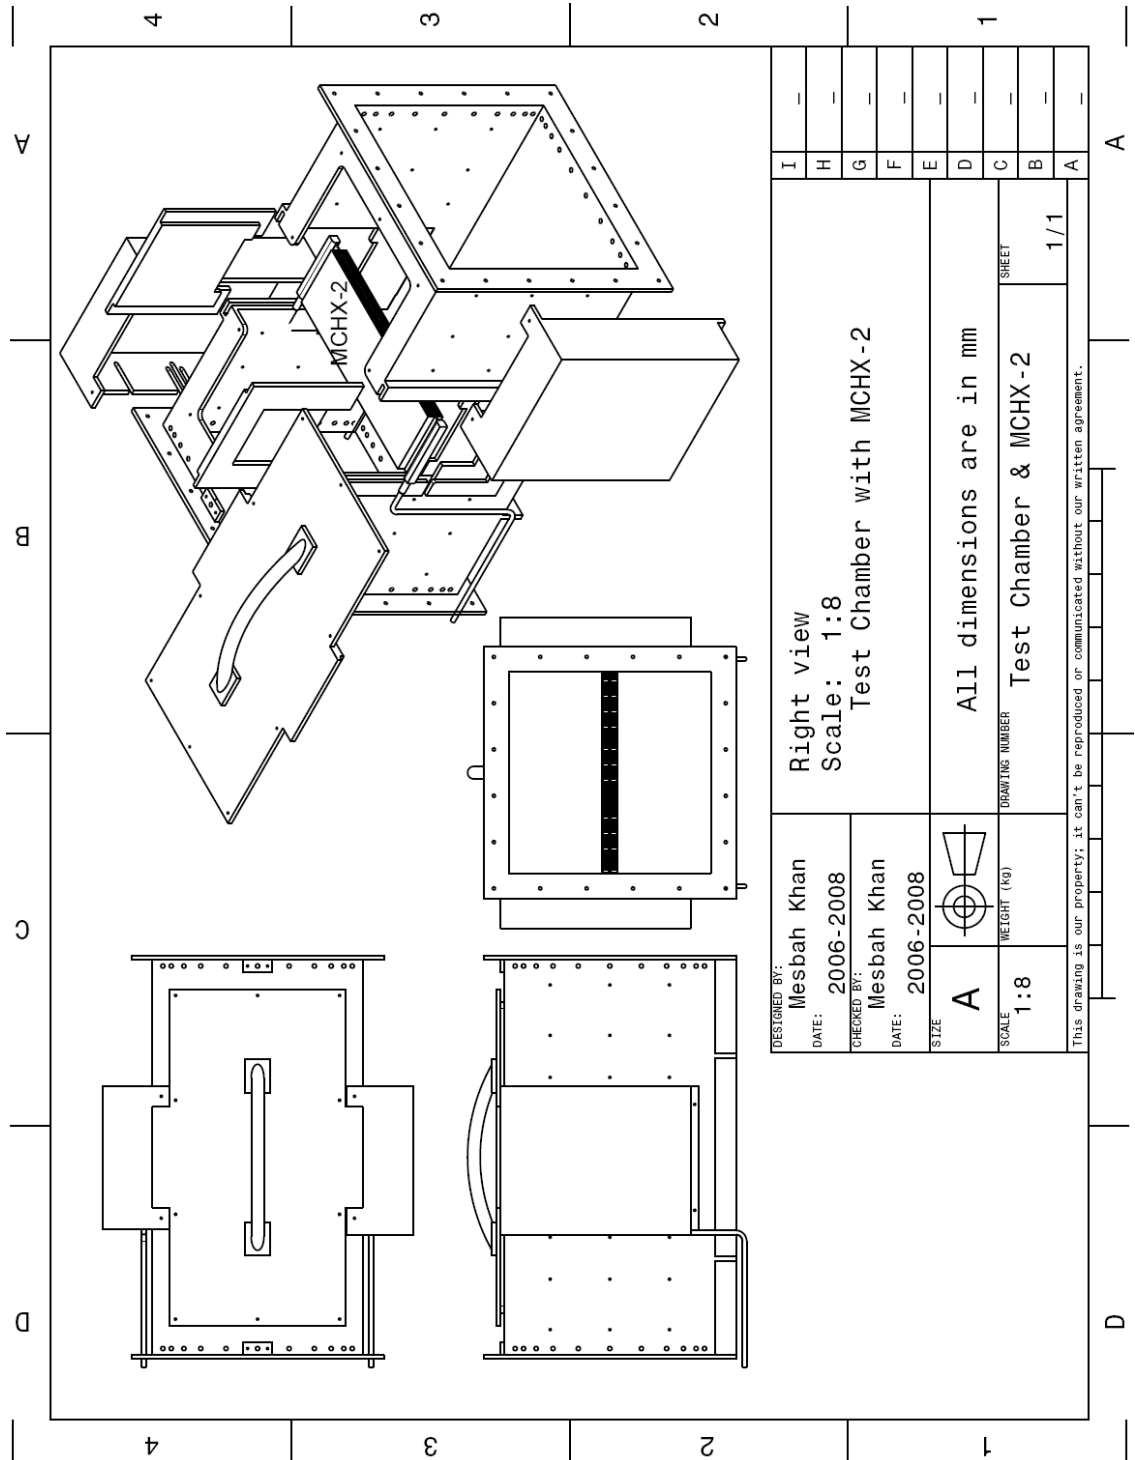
Design of test chamber support structures for test specimens MCHX-2
